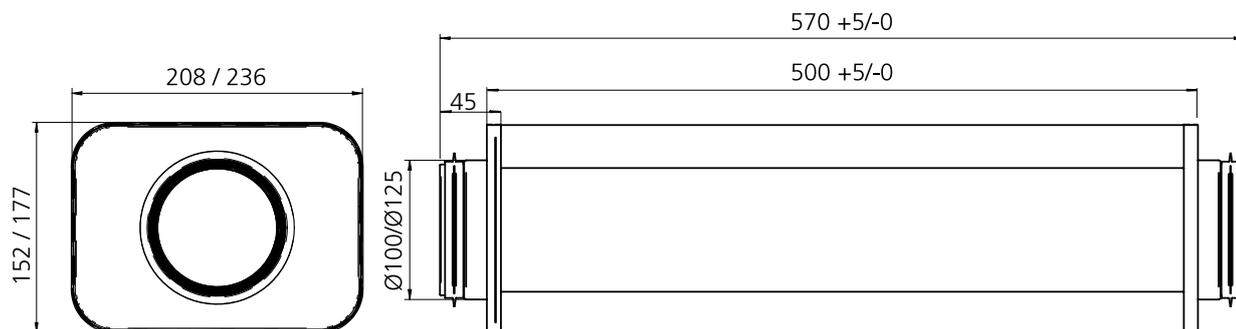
Dimensional drawing sound attenuator CLA Ø 100-500 or Ø125-500.
